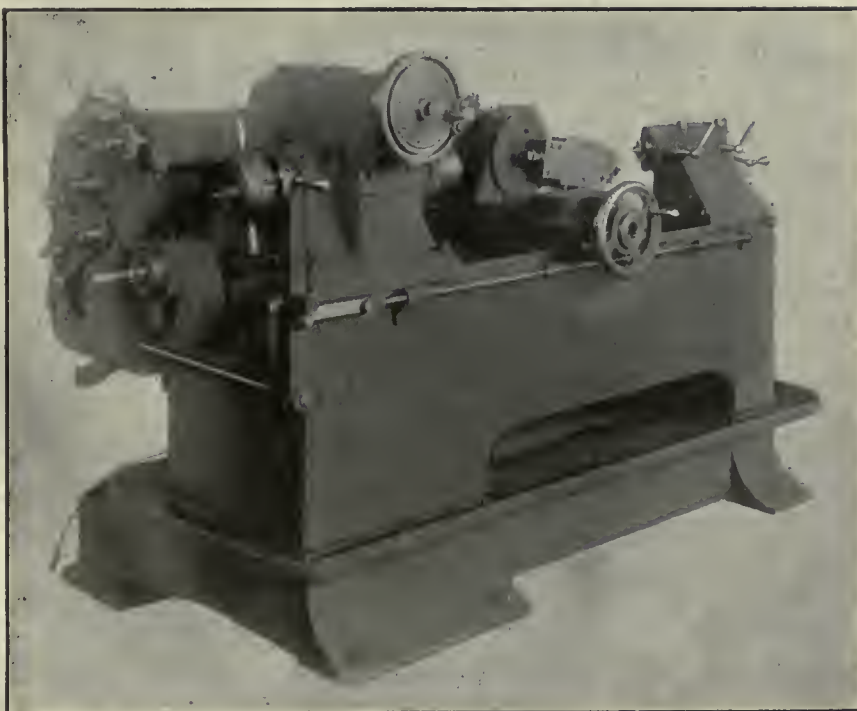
LEES-BRADNER THREAD MILLING MACHINE.
